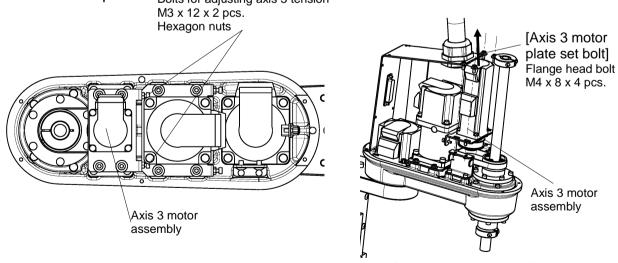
Dismounting axis 3 motor assembly (KHL-300, KHL-400)
